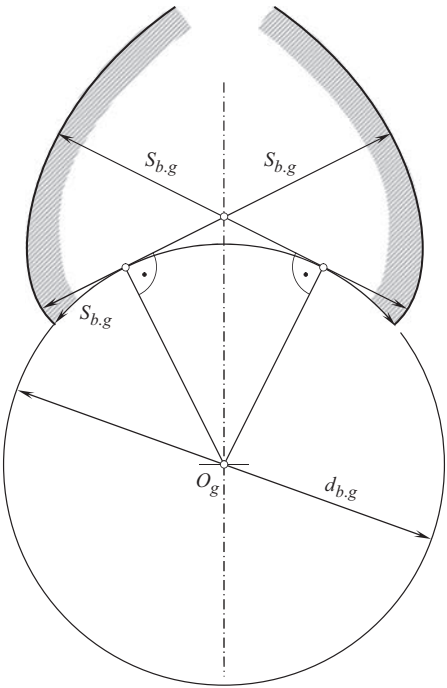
Equidistant base thickness of an involute gear tooth.
